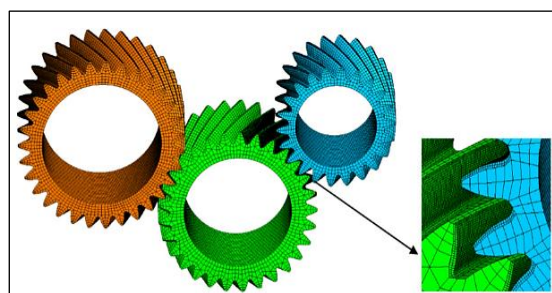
Three Gear Mesh Assembly and Details of their Local Mesh.
